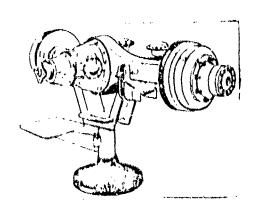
GARO model 689-00-00 stand for disassembling and assembling motor vehicle axles
